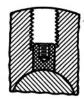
This shows another method of removing a plug, by first removing the clamping screw and then inserting a small screw to fit the tapped hole.
